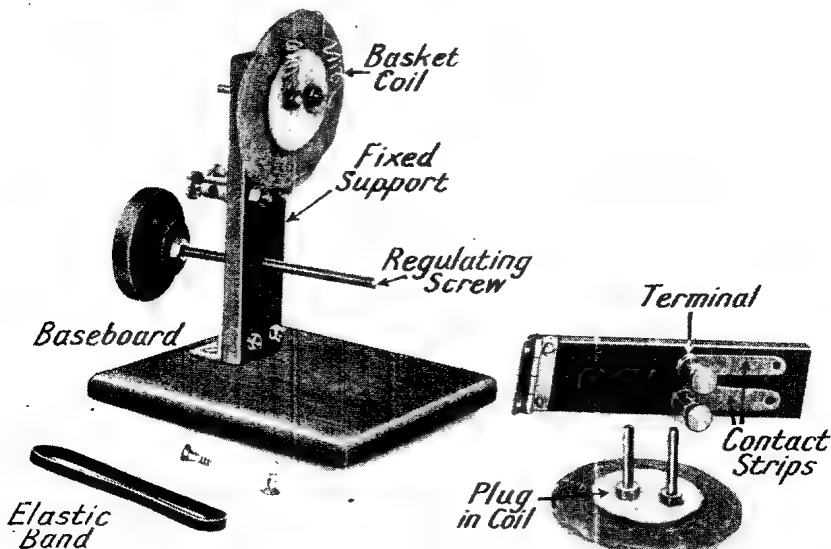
Hardwood or ebonite may be used for making this type of holder. The fixed upright is held by angle brass and a small butt hinge serves as a pivot for the movable arm
